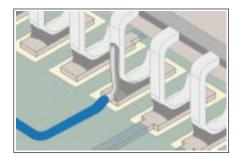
Acceptable* Wire soldered parallel to component lead.
